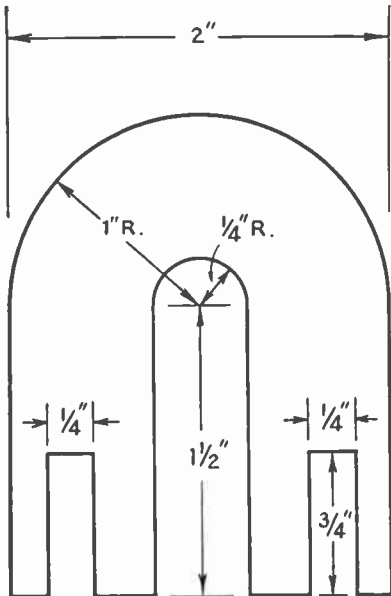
Tank inductance construction. This drawing is full size and may be used as a template.
